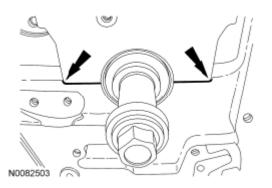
Locating Main Bearing Beam Side Fit Surfaces
